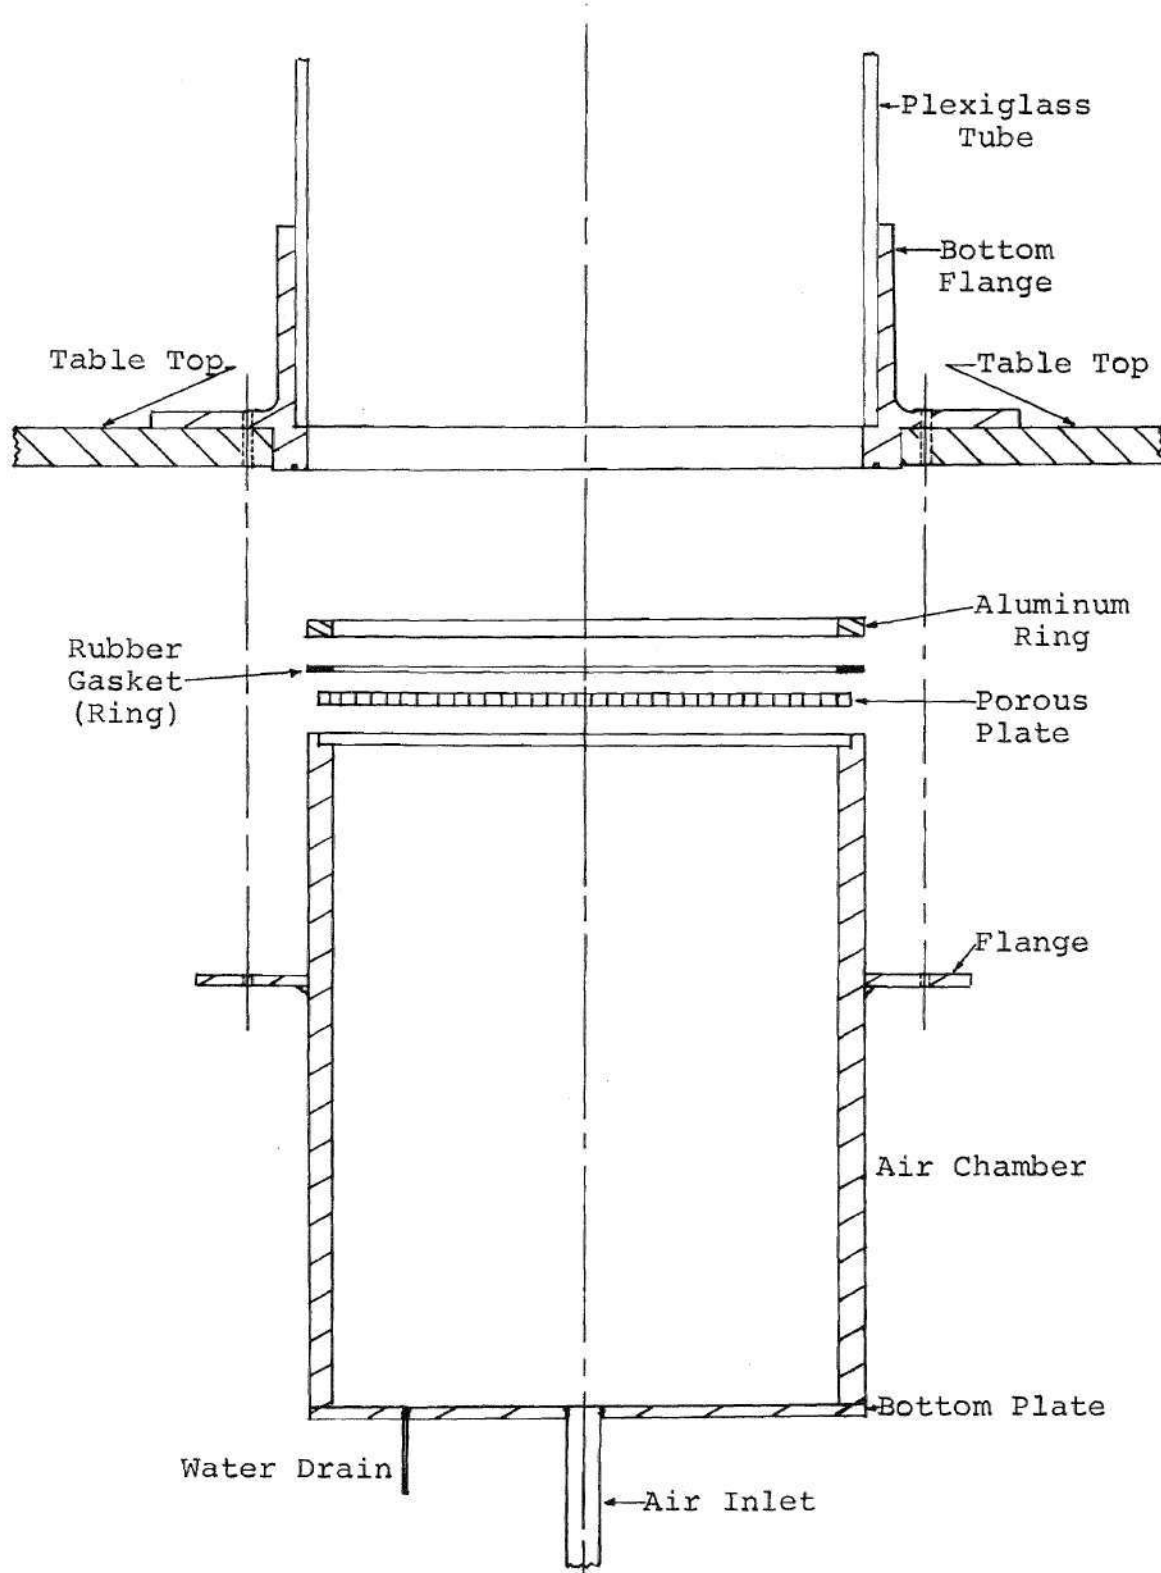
Cross Section of Air Chamber and Bottom Flange Assembly for the 11.5 Inch I.D. Test Section
